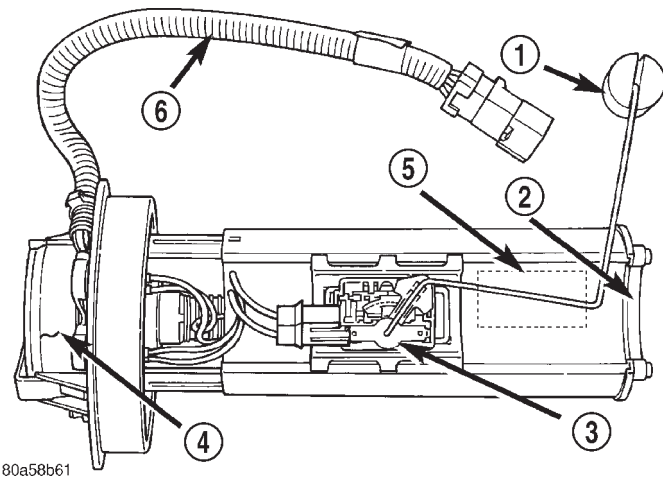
Fuel Gauge Sending Unit Location—4 Door Models
